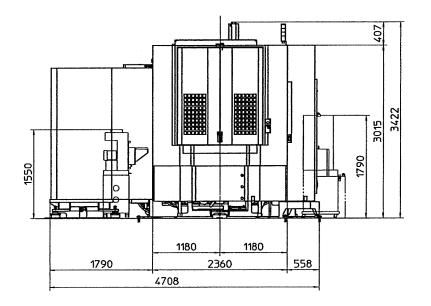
Front and Side View of Machine: a82 (Tool Magazine A186 or Above and Rear Discharge Lift-Up Conveyor Spec.)
